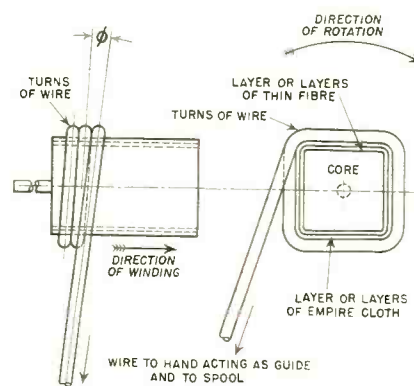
Illustrating the fundamentals of winding on bobbin of square cross-section.
